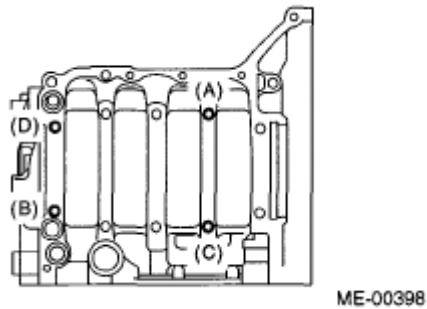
Identifying Tightening Sequence Of Cylinder Block Connecting Bolts
